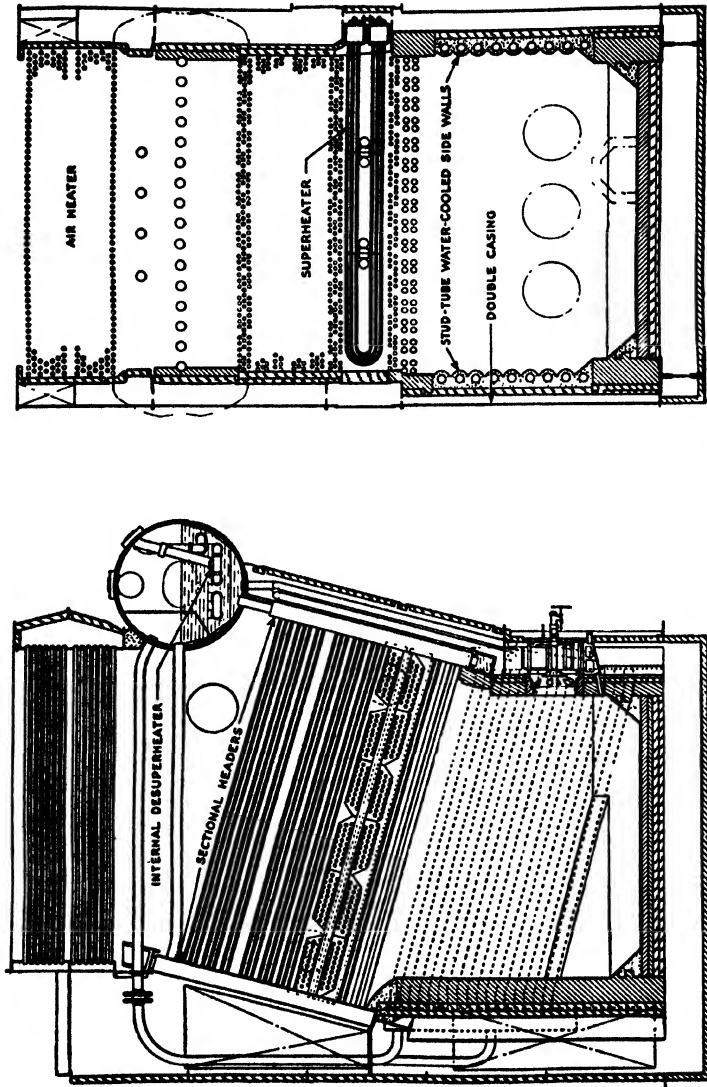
Babcock and Wilcox single-pass cross-drum boiler.
